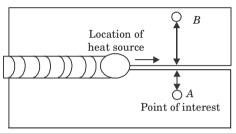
Schematic of welding showing location of two points A and B.
